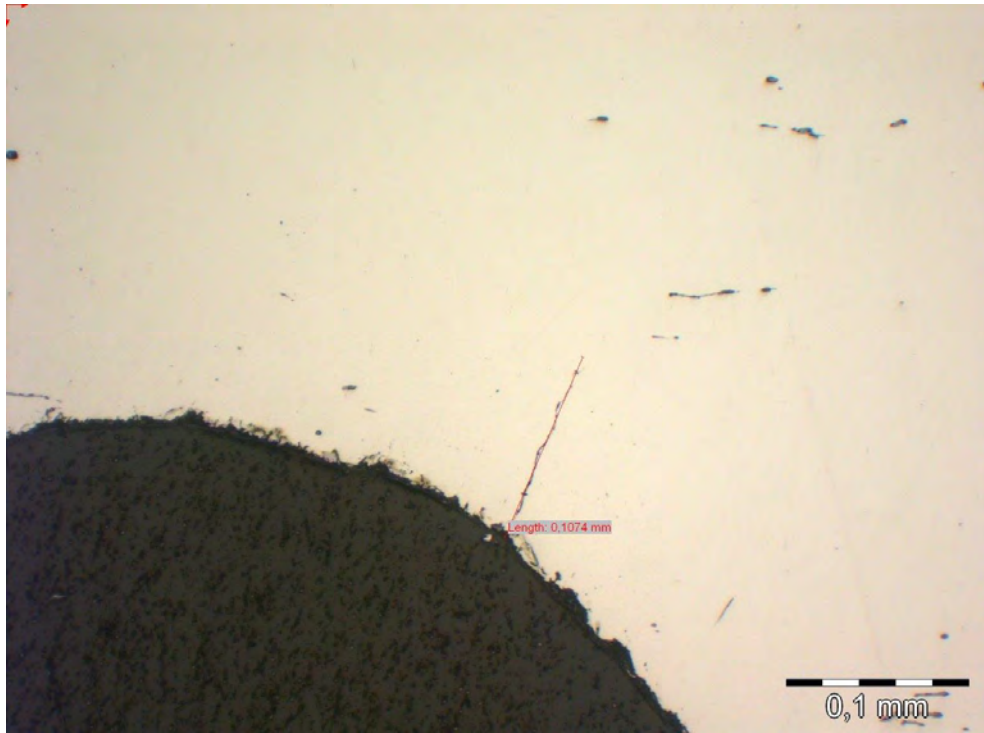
Cut five in crack at segment B, fourth ridge on barrel no. SFK 0120-A
